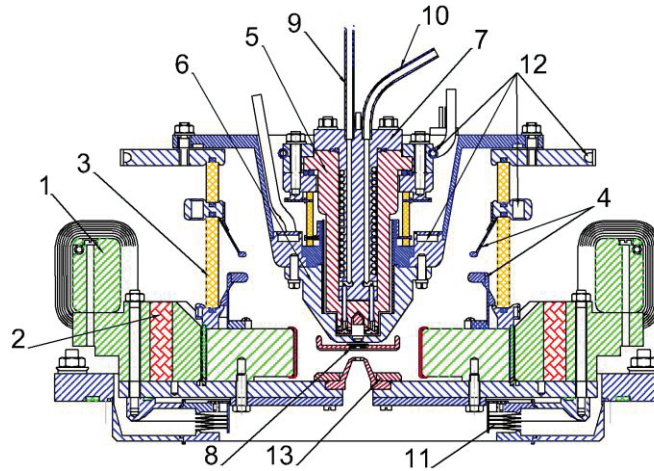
The ion source cross-section layout. 1 – additional coils of magnet; 2 – NdFeB inserts; 3 – HV insulator; 4 – stainless steel screens; 5 – cathode body; 6 – anode body; 7 – cathode heater support; 8 – extraction electrode with removable insert; 9 – H_2 feeding tube; 10 – cesium feeding tube; 11 – bellow; 12 – water cooling channels; 13 – acceleration electrode.
